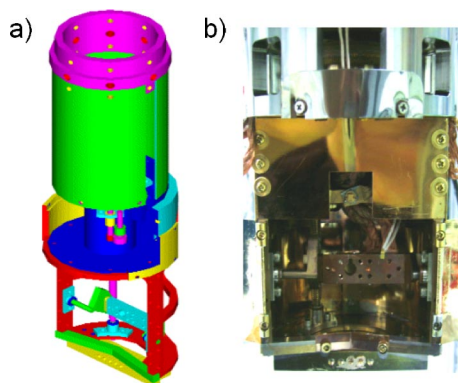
(Color online) (a) A three dimensional CAD drawing of the designed manipulator and (b) a picture of the constructed manipulator.
